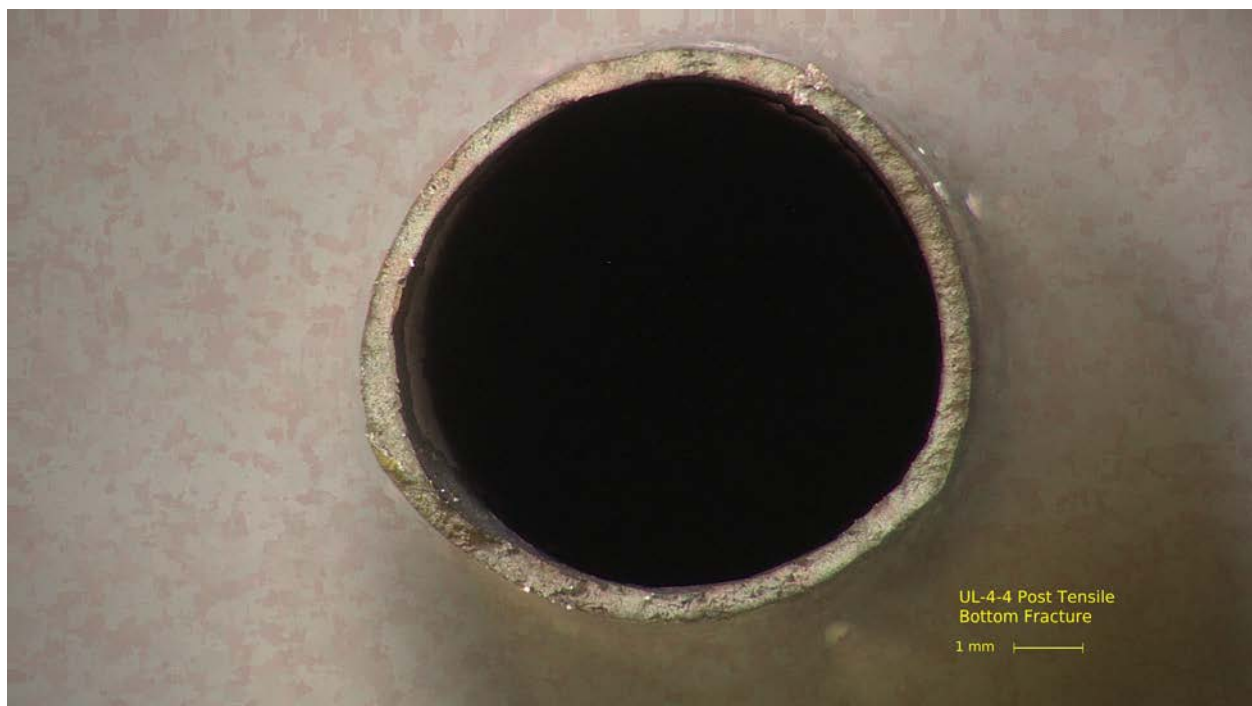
Post-Tensile Image Bottom Fracture for UL-4-4
